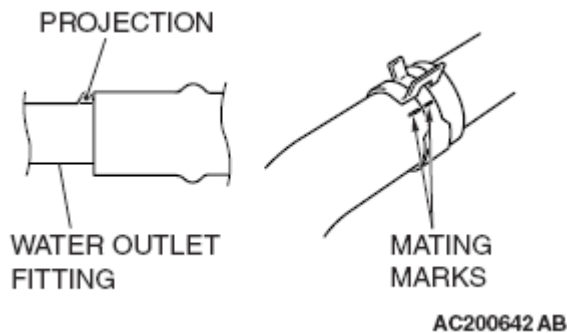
Mating Marks On Radiator Upper Hose And Hose Clamp
